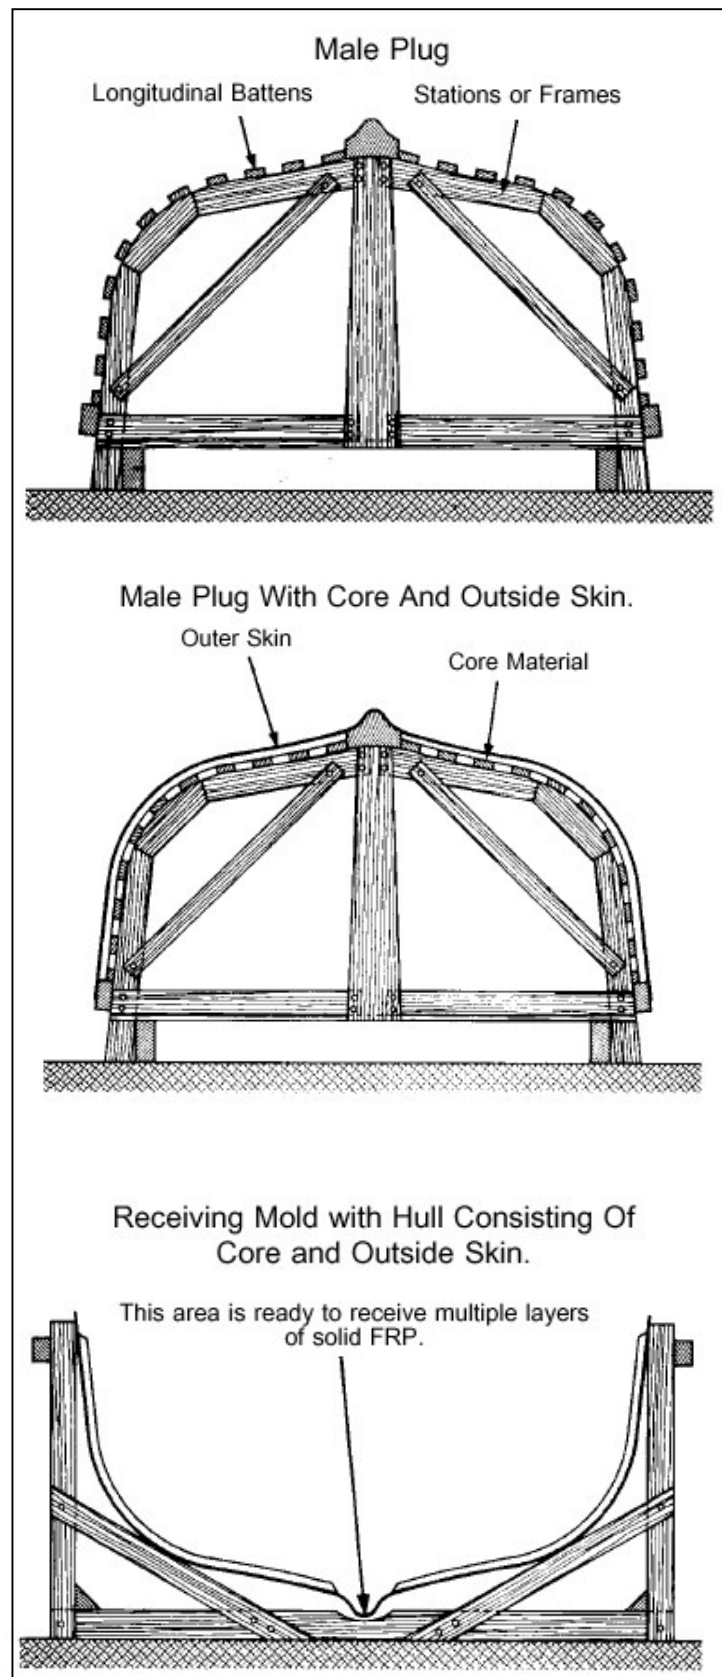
Simple, Wood Frame Male Plug used in Sandwich Construction (Greene 2004)
